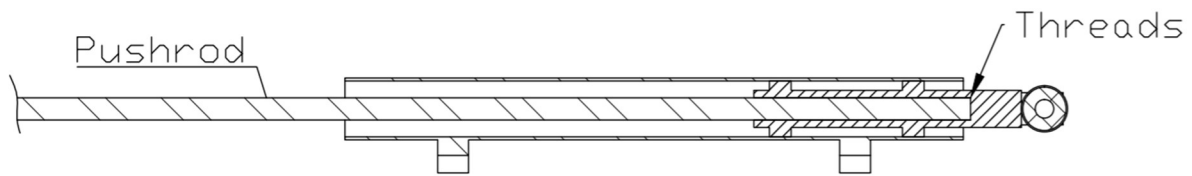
Cross section of Pushrod 1's connection to the cam follower inside the tube guiding and supporting the follower.
